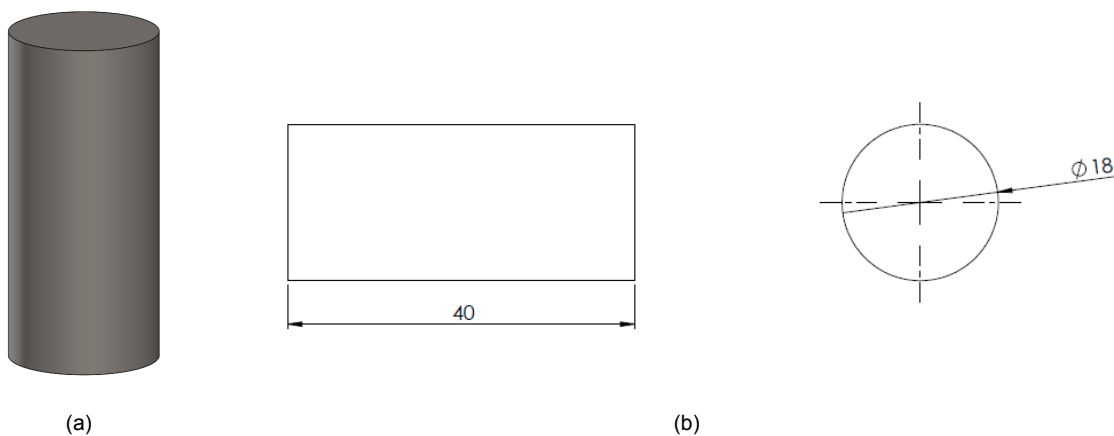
Compression specimen (a) Render; (b) Technical drawing.
